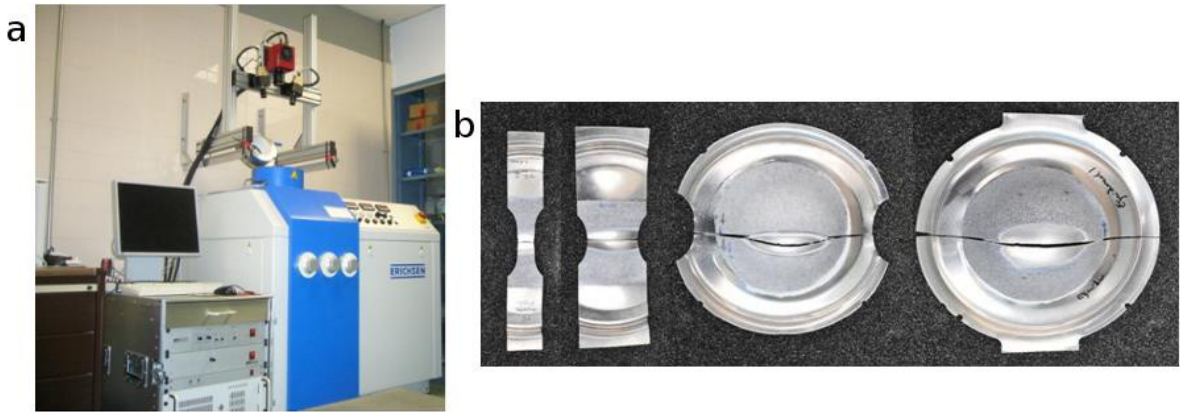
(a) universal sheet metal testing machine and image recording system; (b) specimen geometries after testing.
